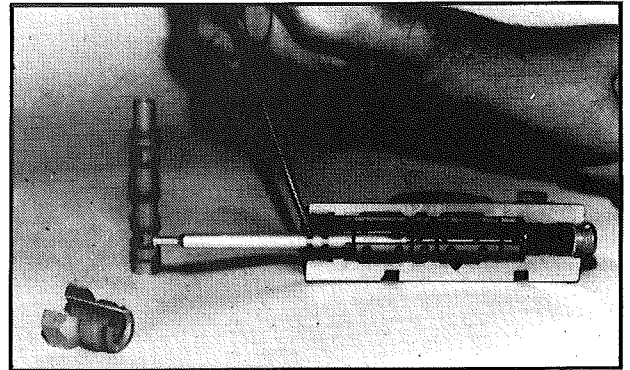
Insert tool in second row of holes in sleeve and if necessary, pry out with screwdriver.
